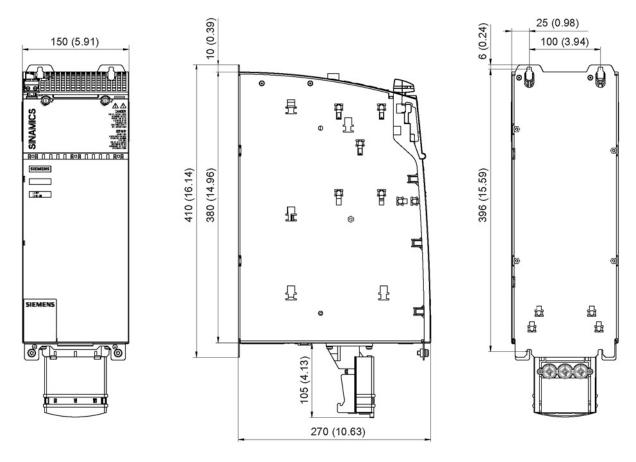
Dimension drawing of 36 kW Smart Line Module with internal air cooling, all dimensions in mm and (inches)
